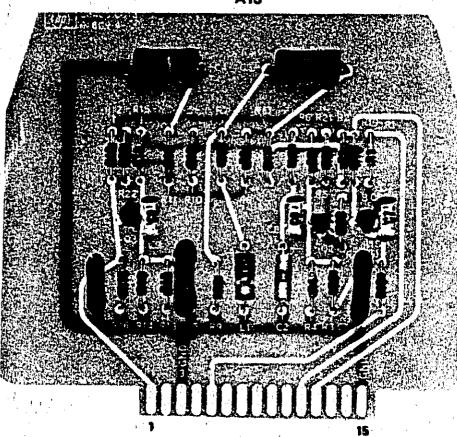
A. Al3 Equalizer Assembly Component Identification (ERRATA)
